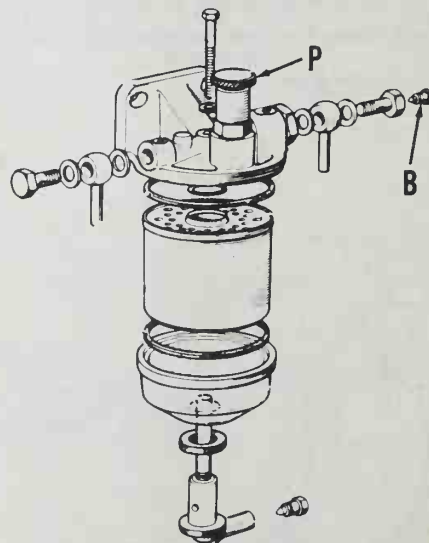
View of fuel filter used on models equipped with Roto Diesel fuel injection pump.
